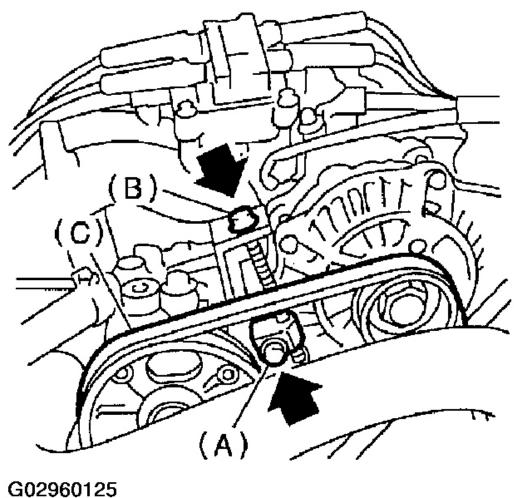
Tightening Lock Bolt & Slider Bolt Courtesy of SUBARU OF AMERICA, INC.
